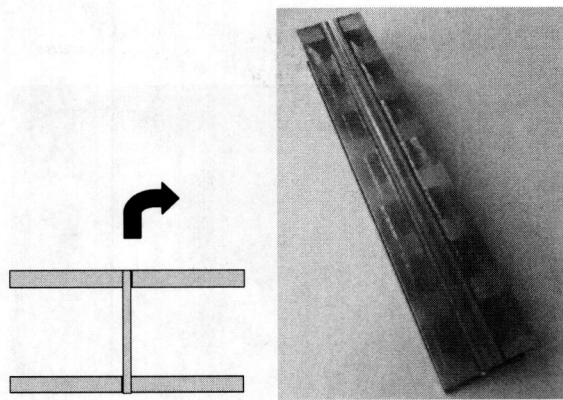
Joining of five elements (Ti-6Al-4V) by laser welding to manufacture a section for A350 aircraft
